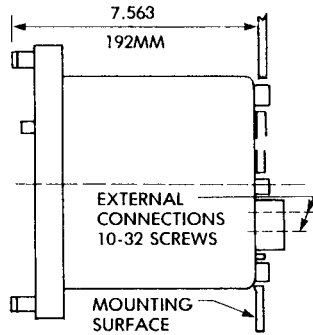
Type C1 case relays recommended for surface mounting (side view) for panels no larger than 0.188 in. (5mm) thick
